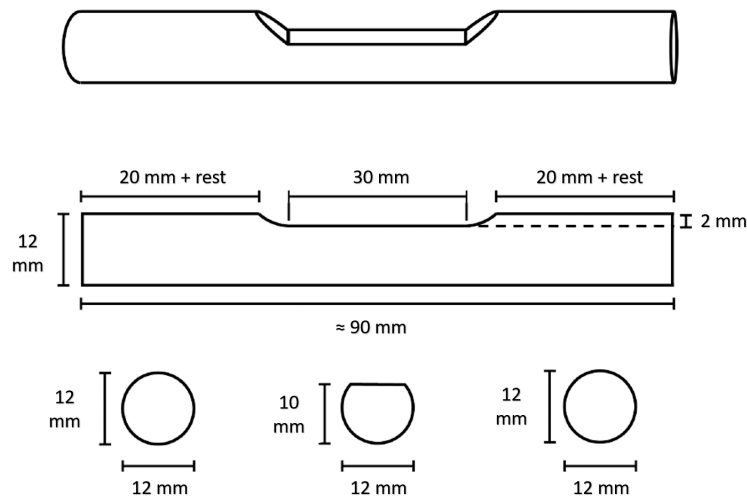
Dimensions of the samples used for tensile testing of the co-extruded rods [33].
